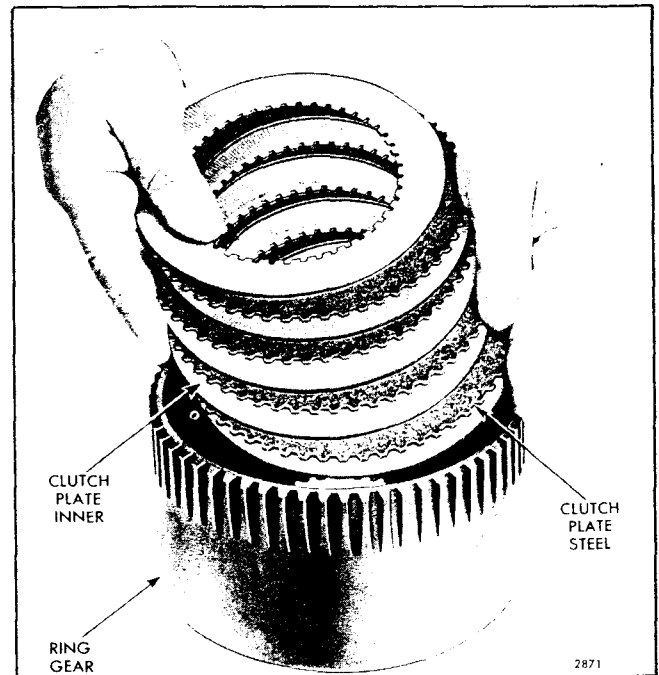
Position of Forward Clutch Plates for Assembly in Ring Gear
